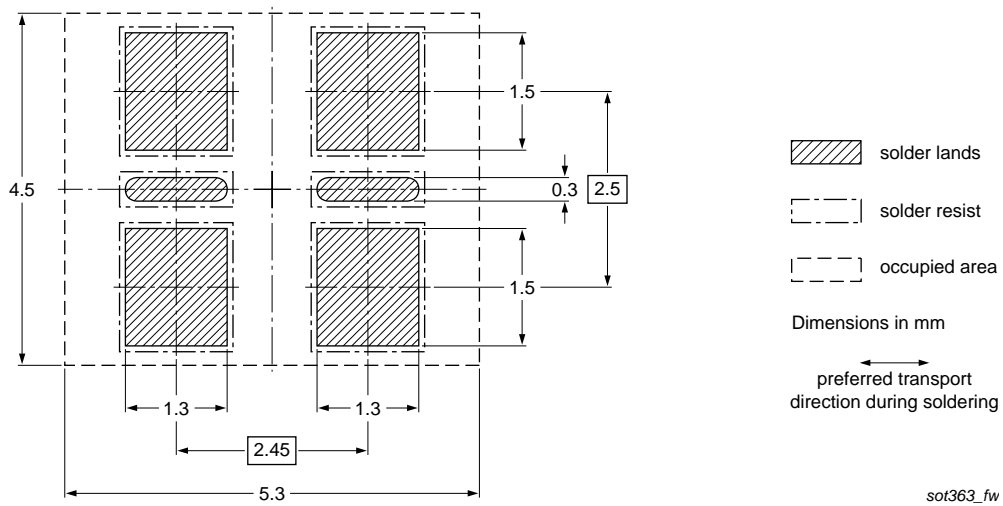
Wave soldering footprint for SOT363 (SC-88)
